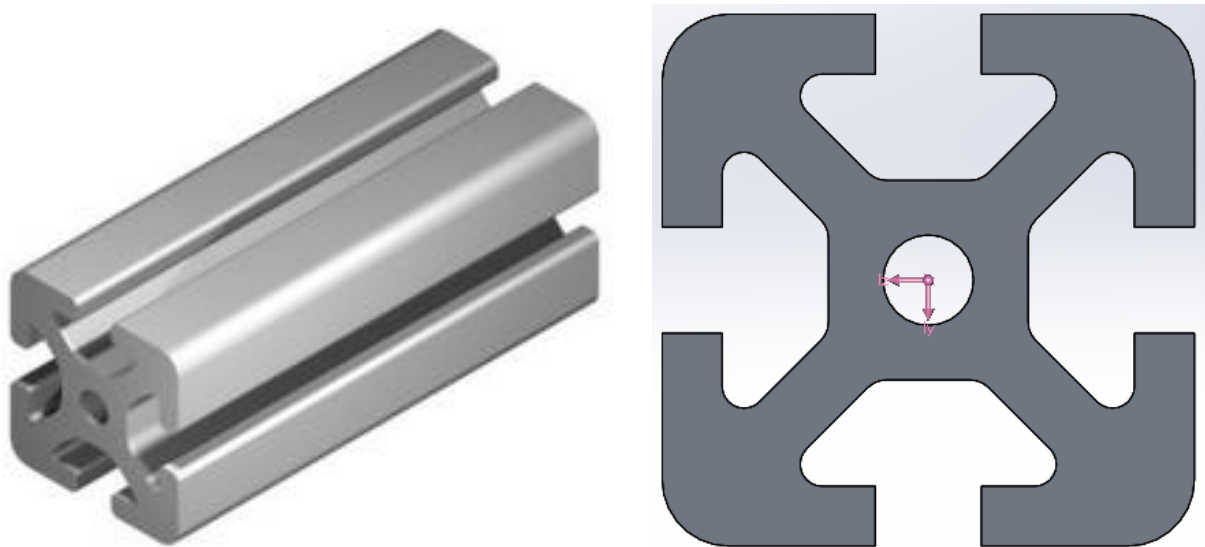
Aluminium extrusion profile picture (left) [214], and CAD designed aluminium extrusion (right)
